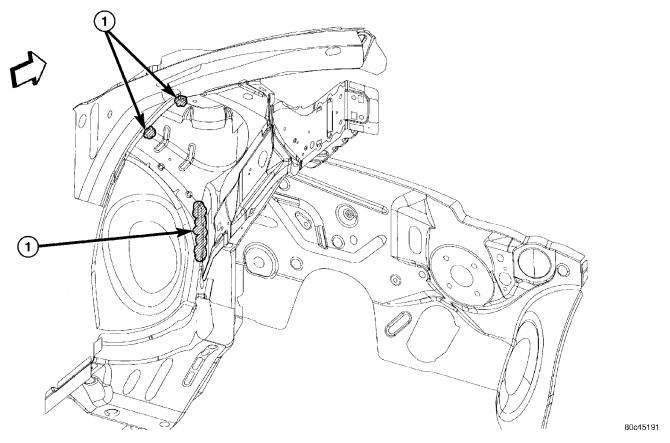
LOAD BEAM, STRUT TOWER, COWL and DASH PANEL
